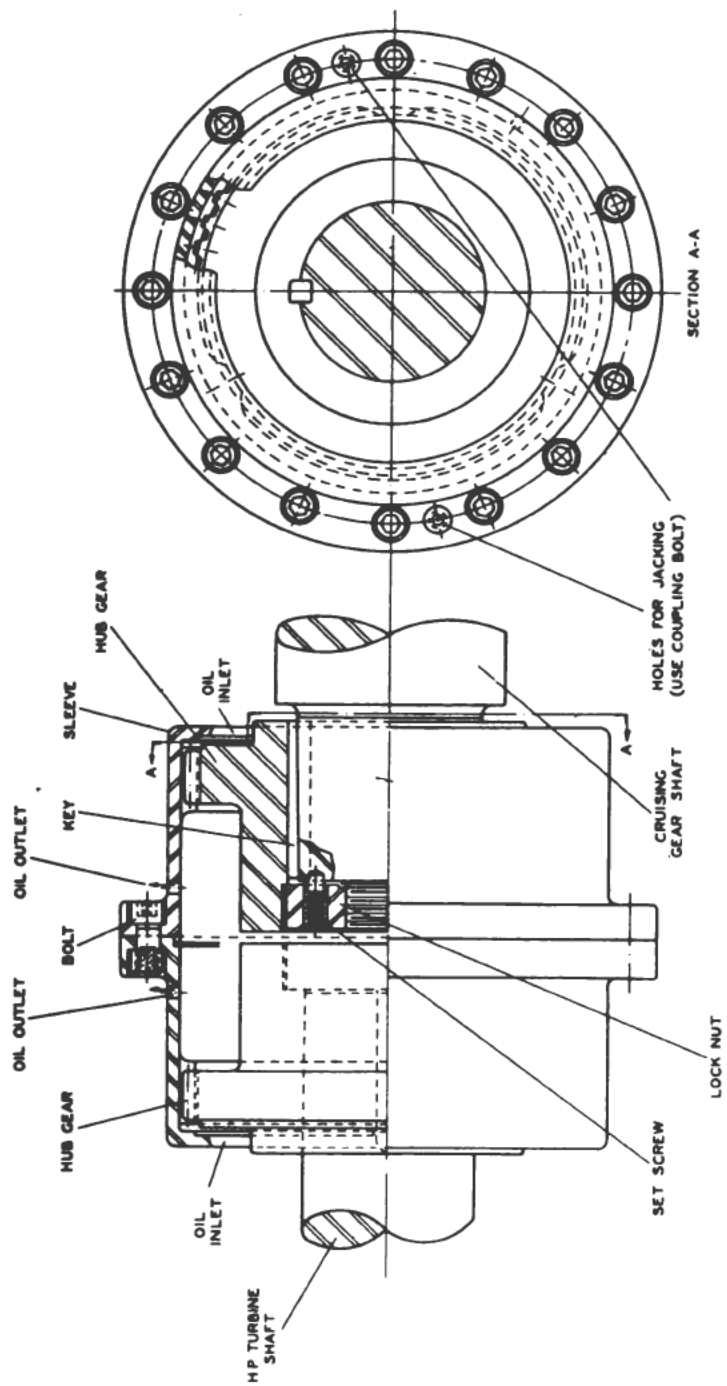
The flexible coupling between the cruising gear and high-pressure turbine.
